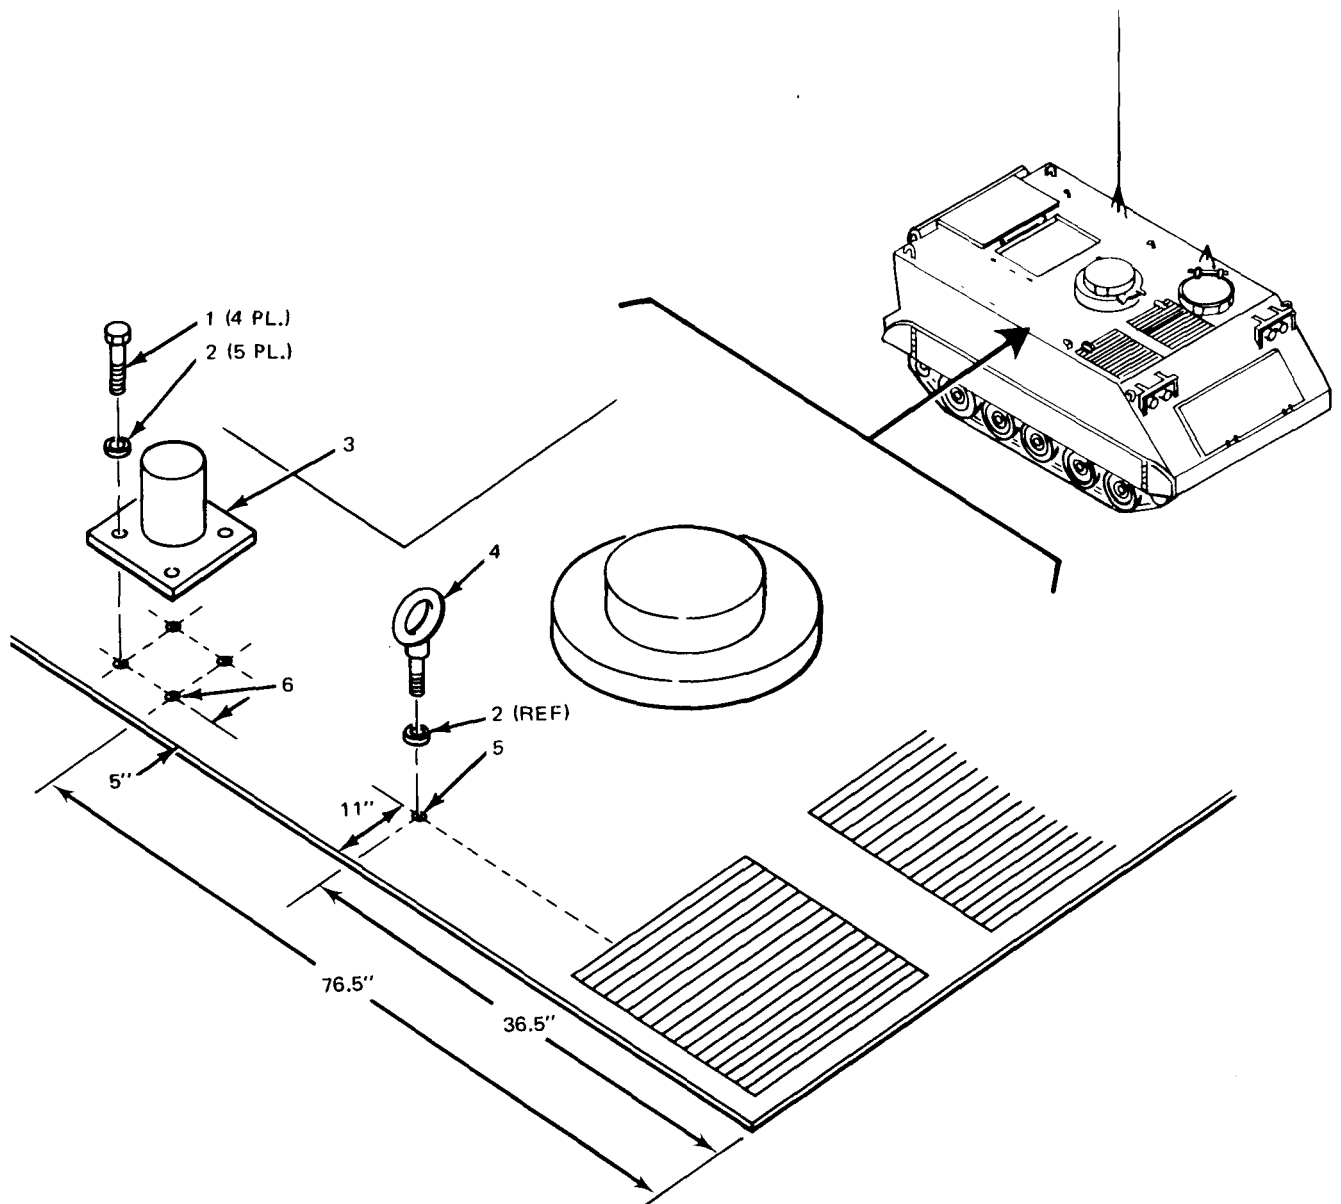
50 Cal Machine Gun Stowage Mount Installation With Brush Guard
